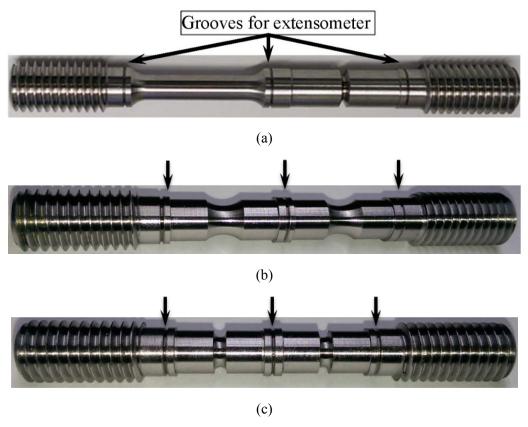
Actual V-notch and U-notch specimens used in testing of notch effects: (a) V-notch specimen, (b) large radius U-notch specimen, (c) small radius U-notch specimen.
